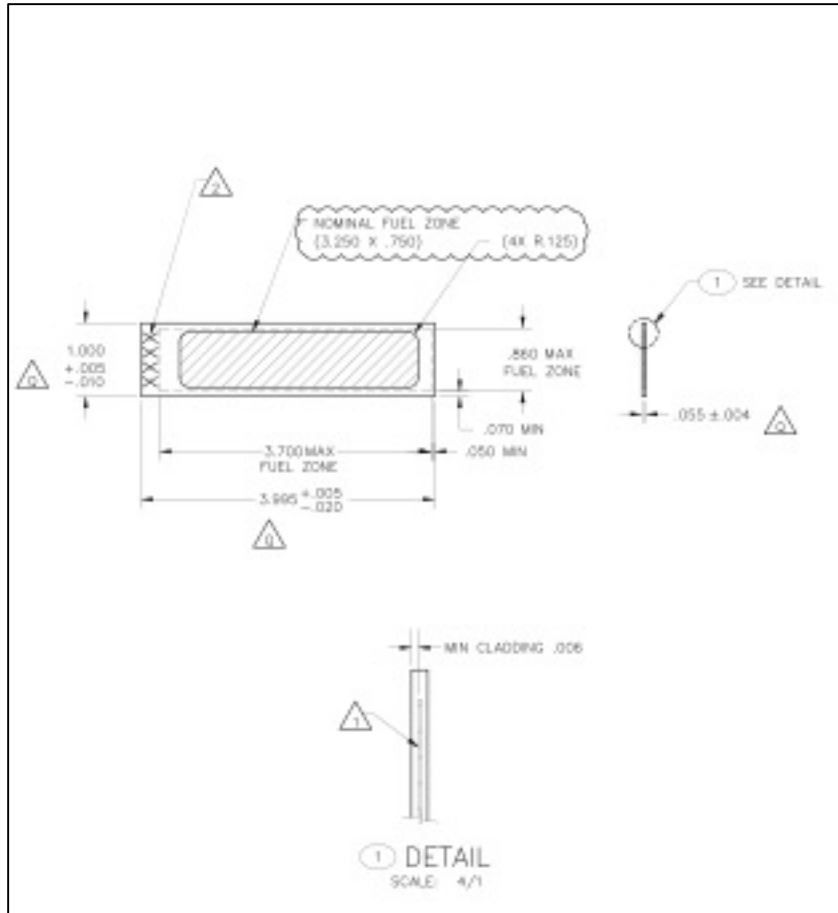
RERTR mini-plate geometry. Dimensions are in inches.
